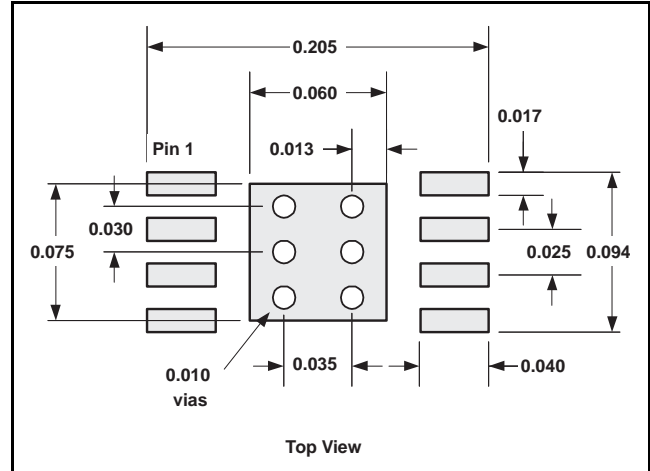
DGN PowerPAD PCB Etch and Via Pattern
